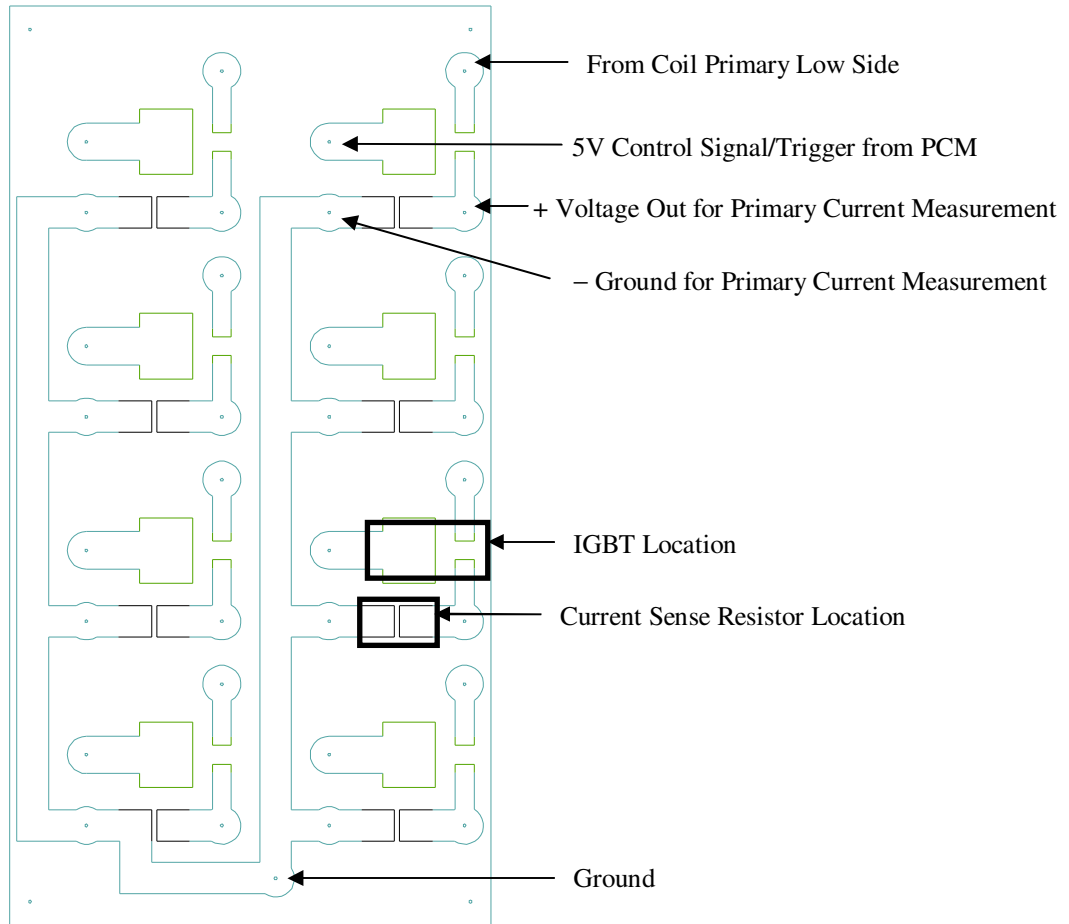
Coil Driver Board Layout/Pad Descriptions
